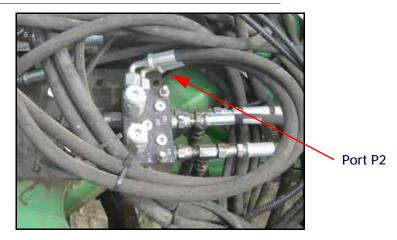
Hoses Installed on AutoBoom Hydraulic Valve
